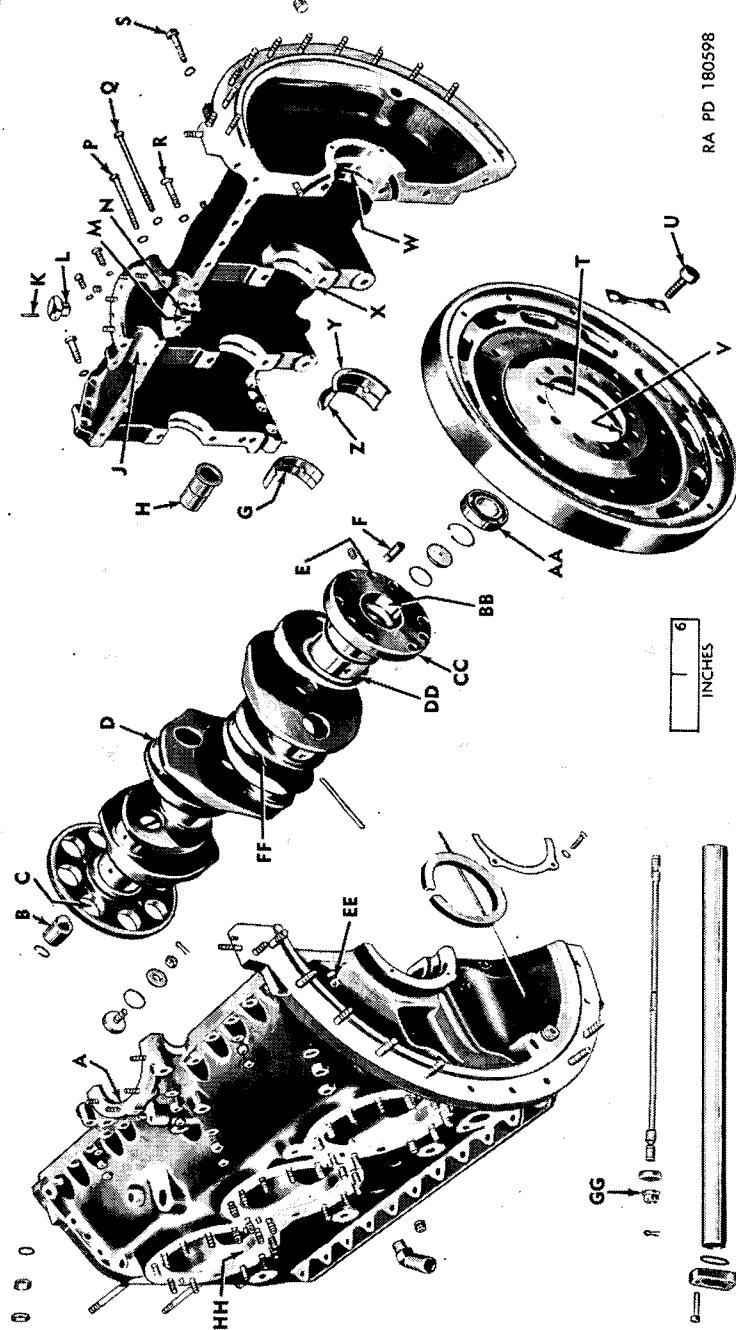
Repair and rebuild standard points of measurement for crankcase and crankshaft.
